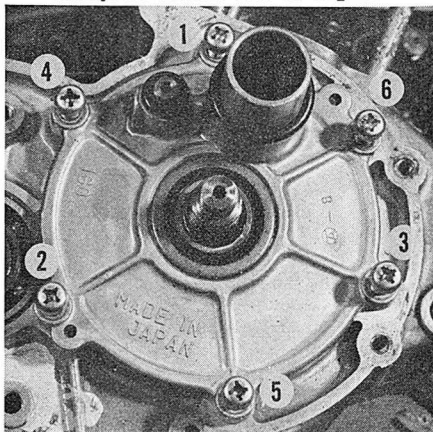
Rotary valve cover should be tightened in sequence shown. Check condition of seals and "O" rings in cover.
